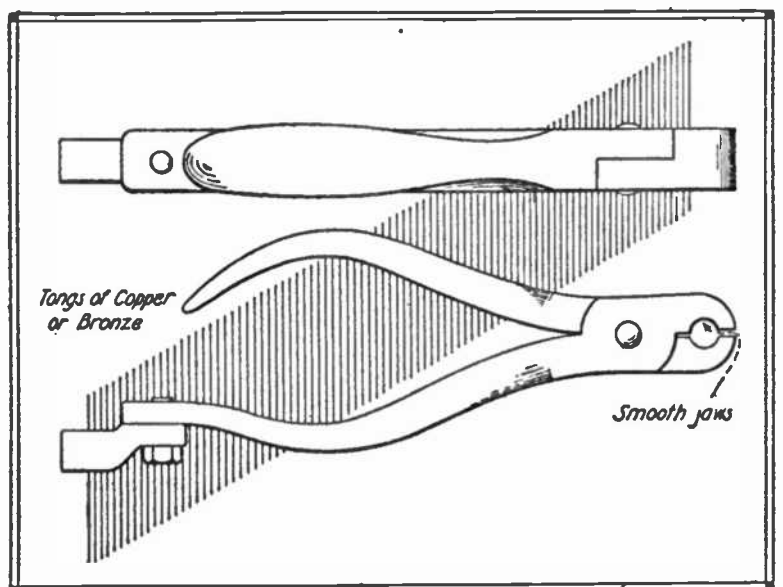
Elevation and Plan Views of Special Bronze or Copper Tongs.
